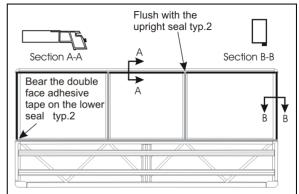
FACE FIXED WINDOWS – 3/16 X 1/2 DOUBLE FACE ADHESIVE TAPE INSTALLATION
